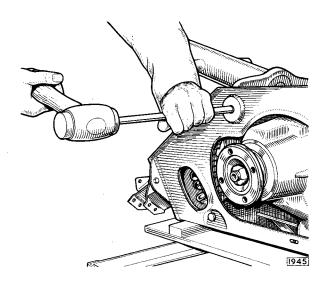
Drifting the inner fulcrum shaft into position and displacing the dummy shaft
